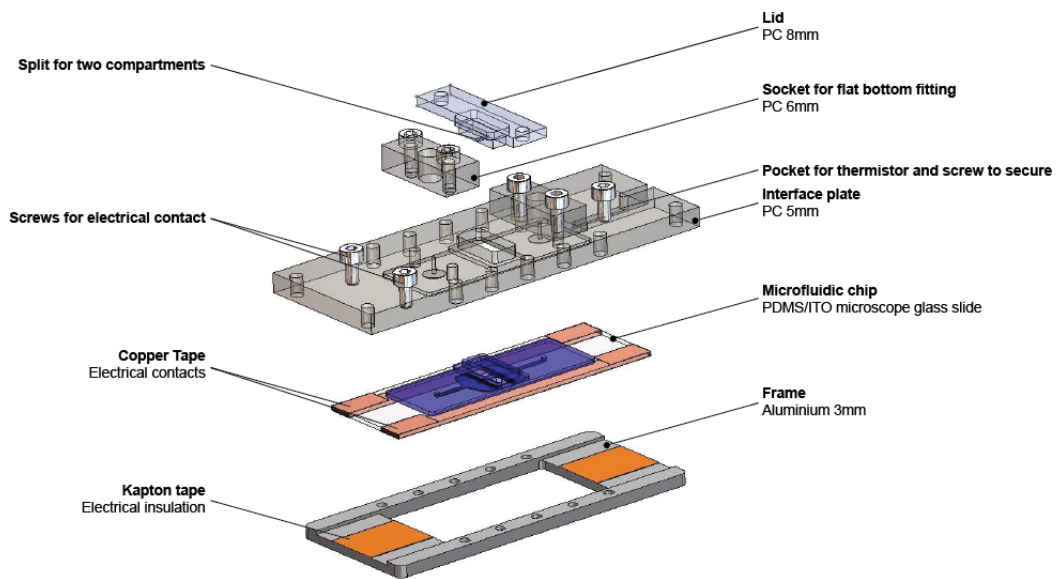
Exploded view of the cell culture device for the platform - Exploded view of the microfabricated cell culture device with the reusable parts of the packaging system and the disposable microfluidic chip consisting of a microfluidic layer, gasket and a resistive indium tin oxide (ITO) microscope slide. The frame has been improved for use on an inverted microscope and has been electrically insulated with Kapton® tape. The packaging system is based on the third generation described in section 2.2.3 and uses the seeding method and a modified microfluidic layer described in section 3.4.4.
